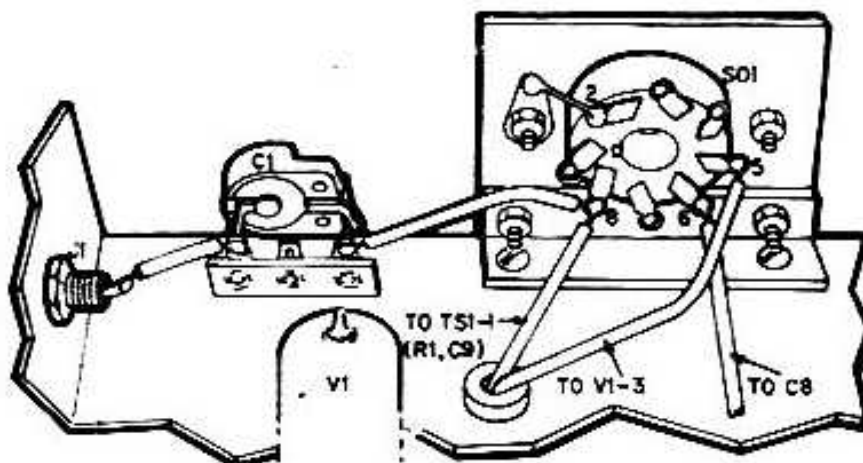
View of top rear of chassis shows how trimmer capacitor C1 and socket for coils are mounted. Cut holes in back of cabinet for access.
